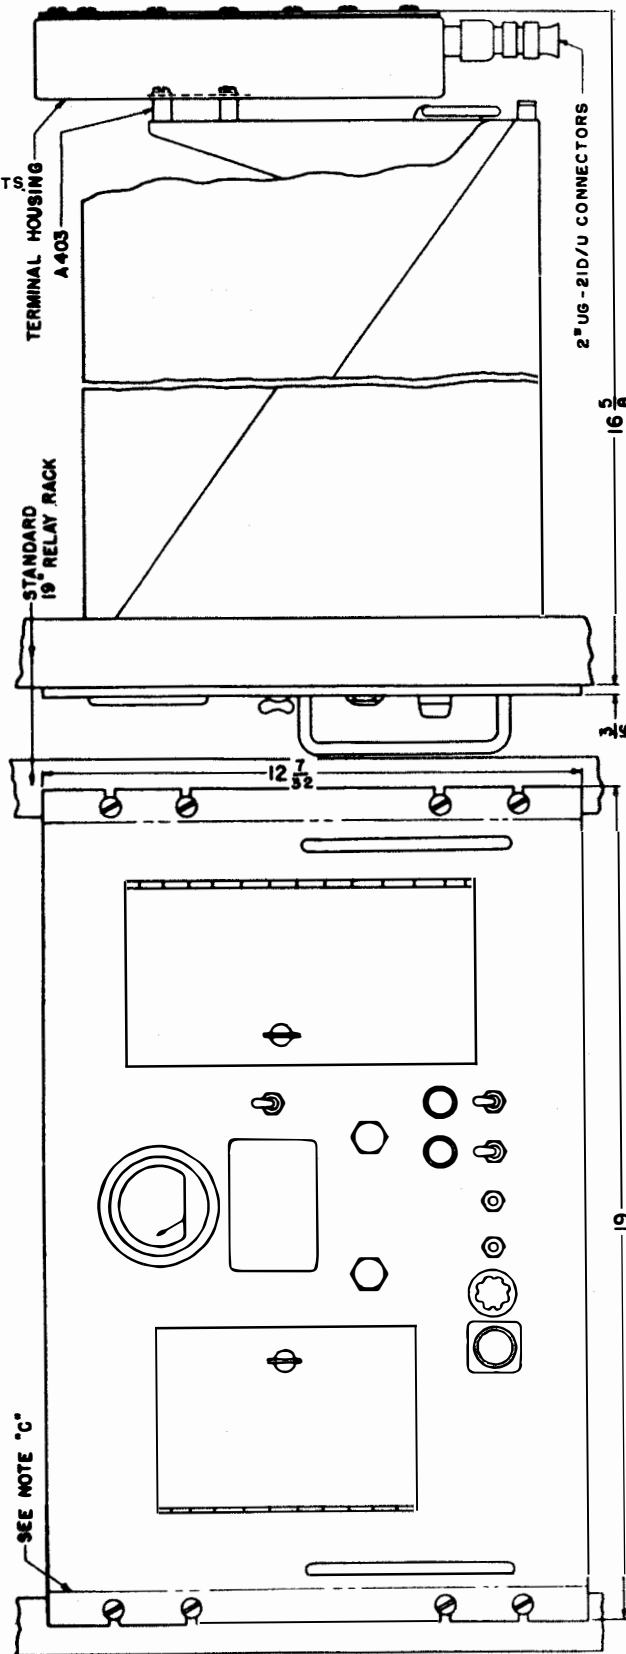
Radio Transmitter T-336C/URT-7, Installation for Relay-Rack Mounting
